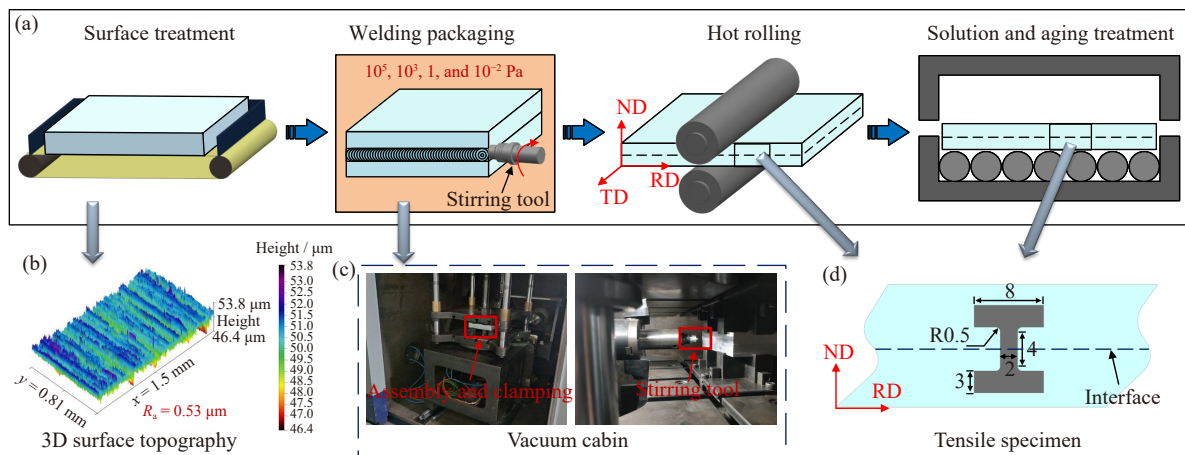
(a) Schematic of HRB, (b) 3D surface topography after surface treatment, (c) assembly and welding in vacuum cabin, and (d) schematic of sampling location and tensile sample shape.
